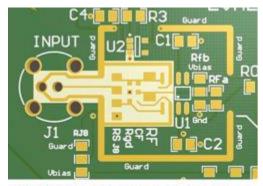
The thick copper trace on this PCB acts as a guard ring. The goldplated traces prevent corrosion. Remove the solder mask in the guarded area to reduce leakage.
